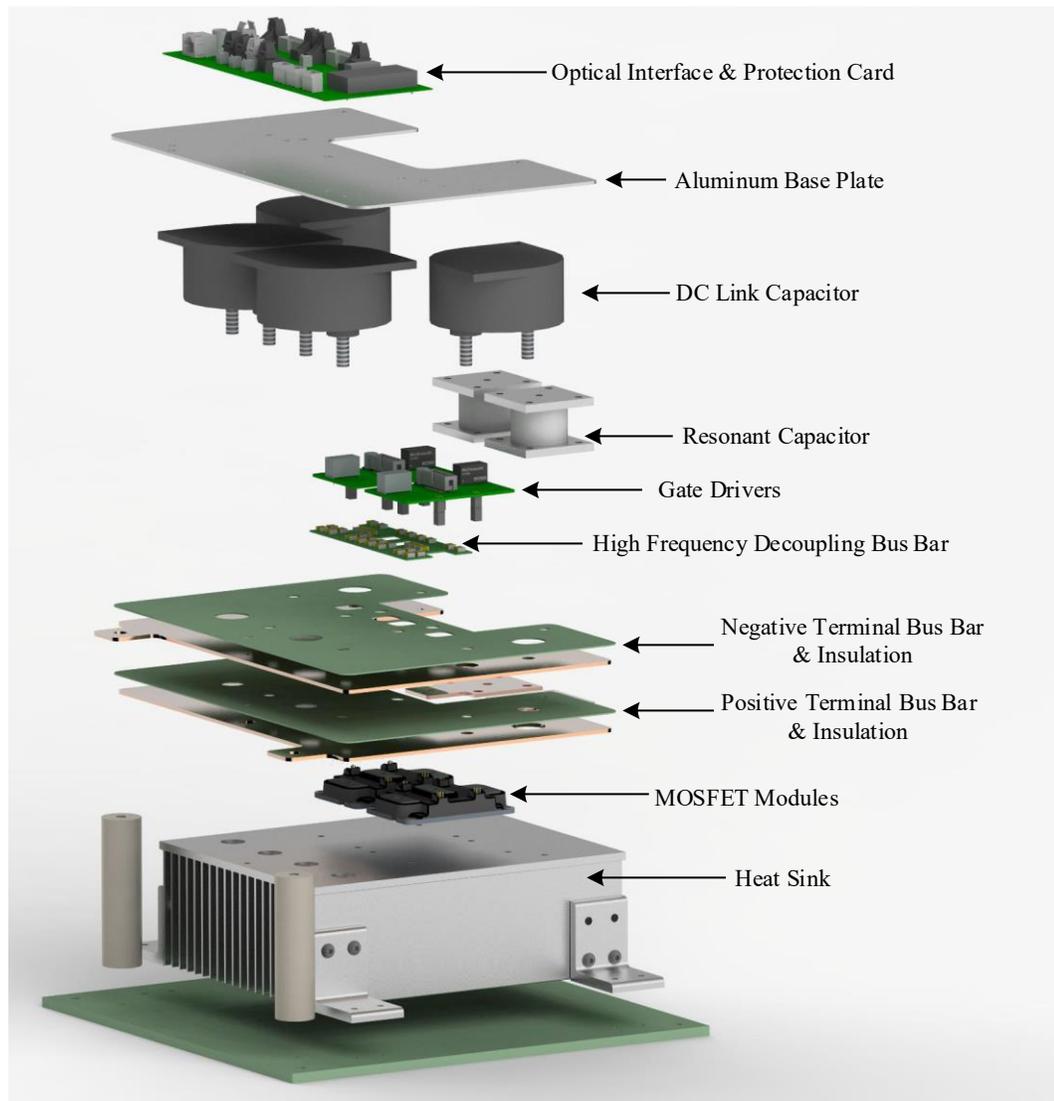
Blown-out CAD model view of the H-bridge assembly
